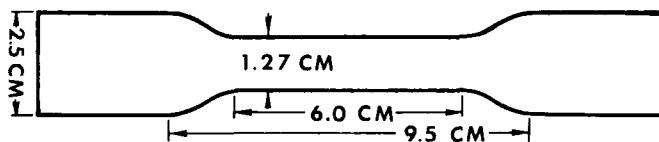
Specimen geometry used for tensile test (5–10 mils thick).
